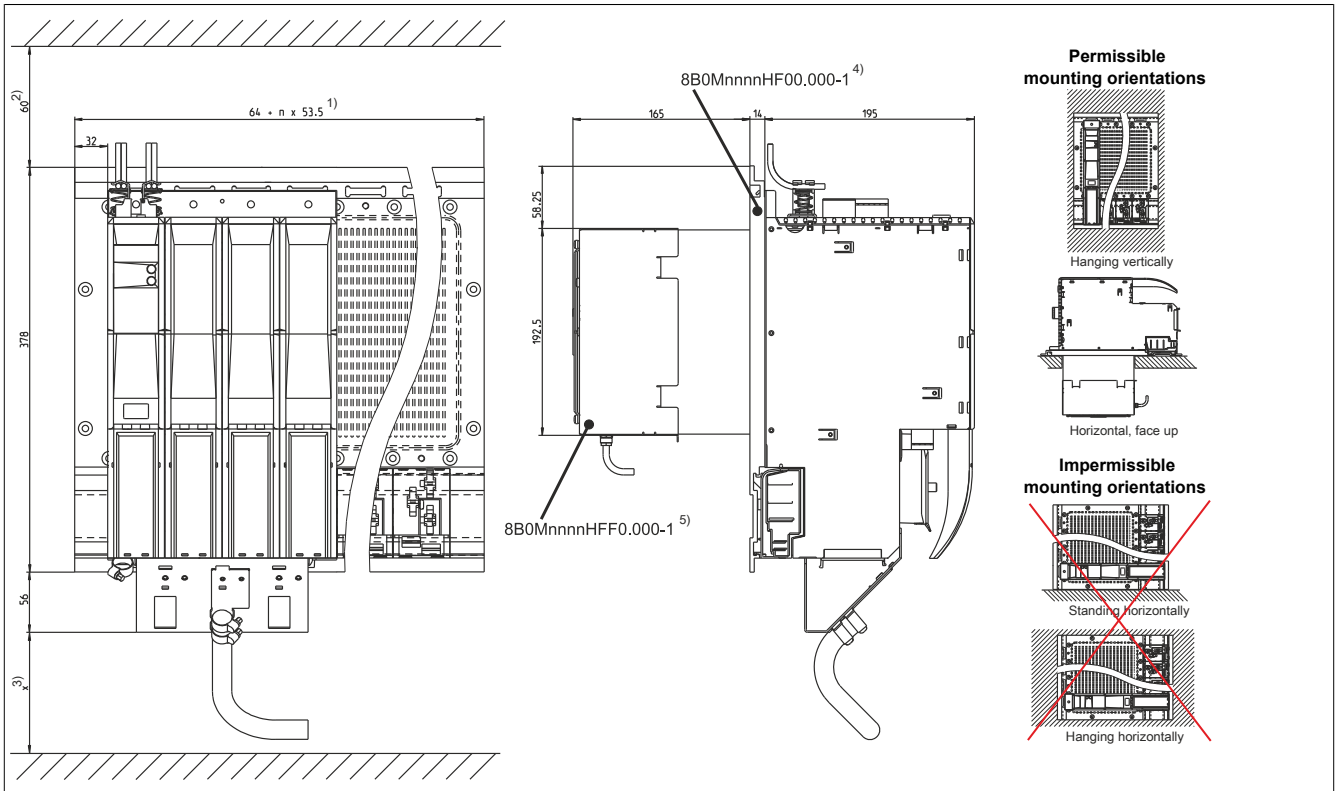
Pass-through mounting - Dimension diagram and installation dimensions
